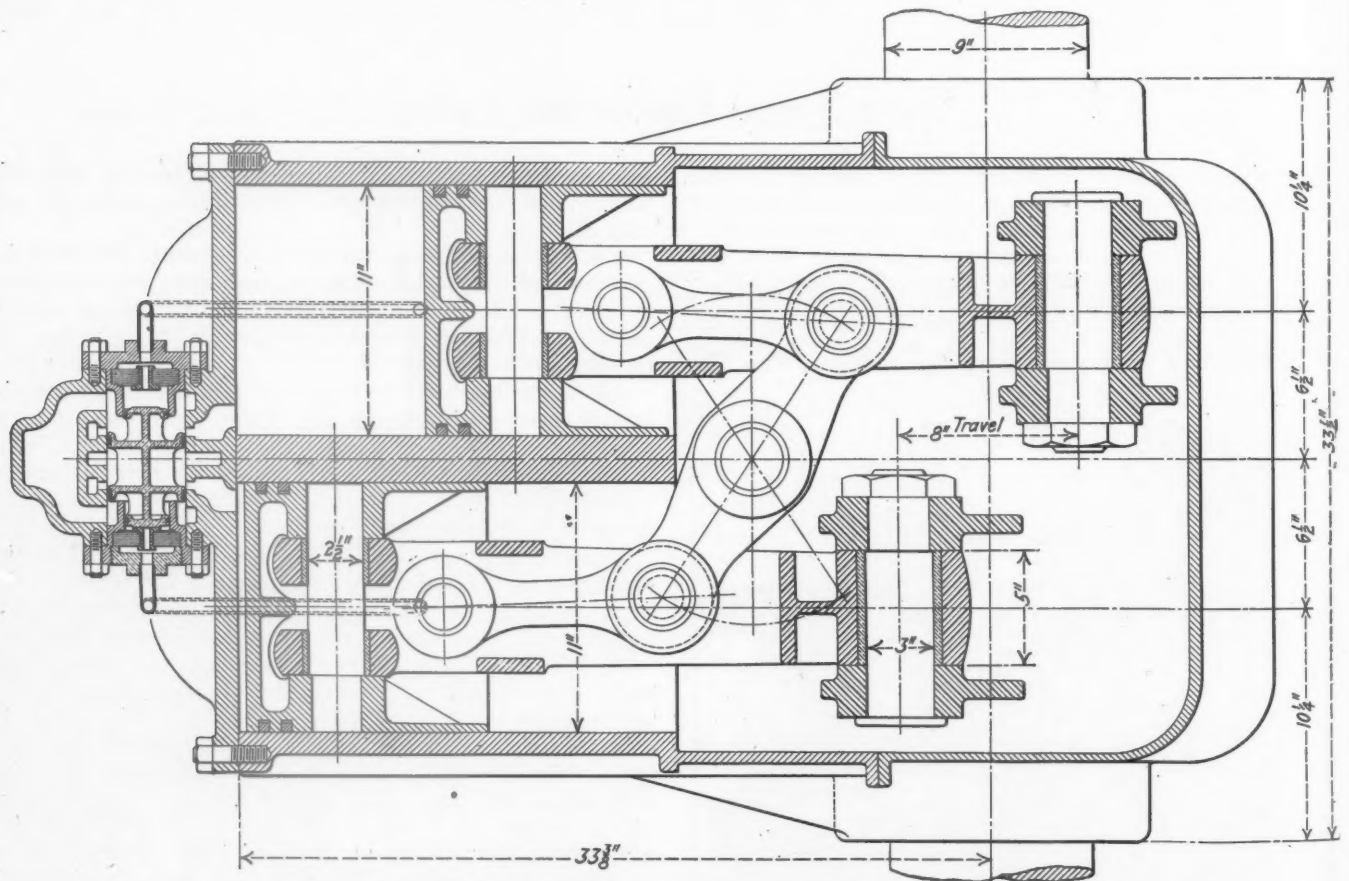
Drawing Showing the Arrangement of the Cylinders and Piston Rods
